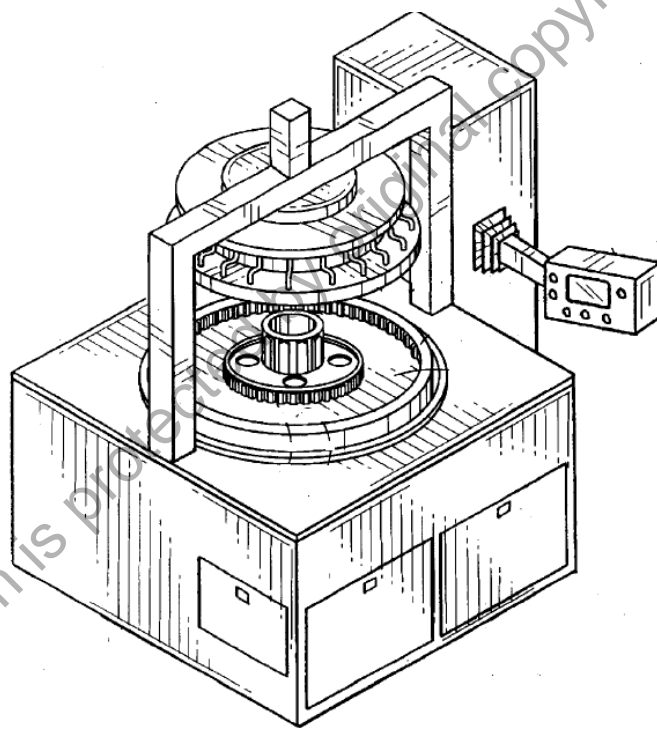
A Perspective view of grinding machine (Lichner, 2000).
